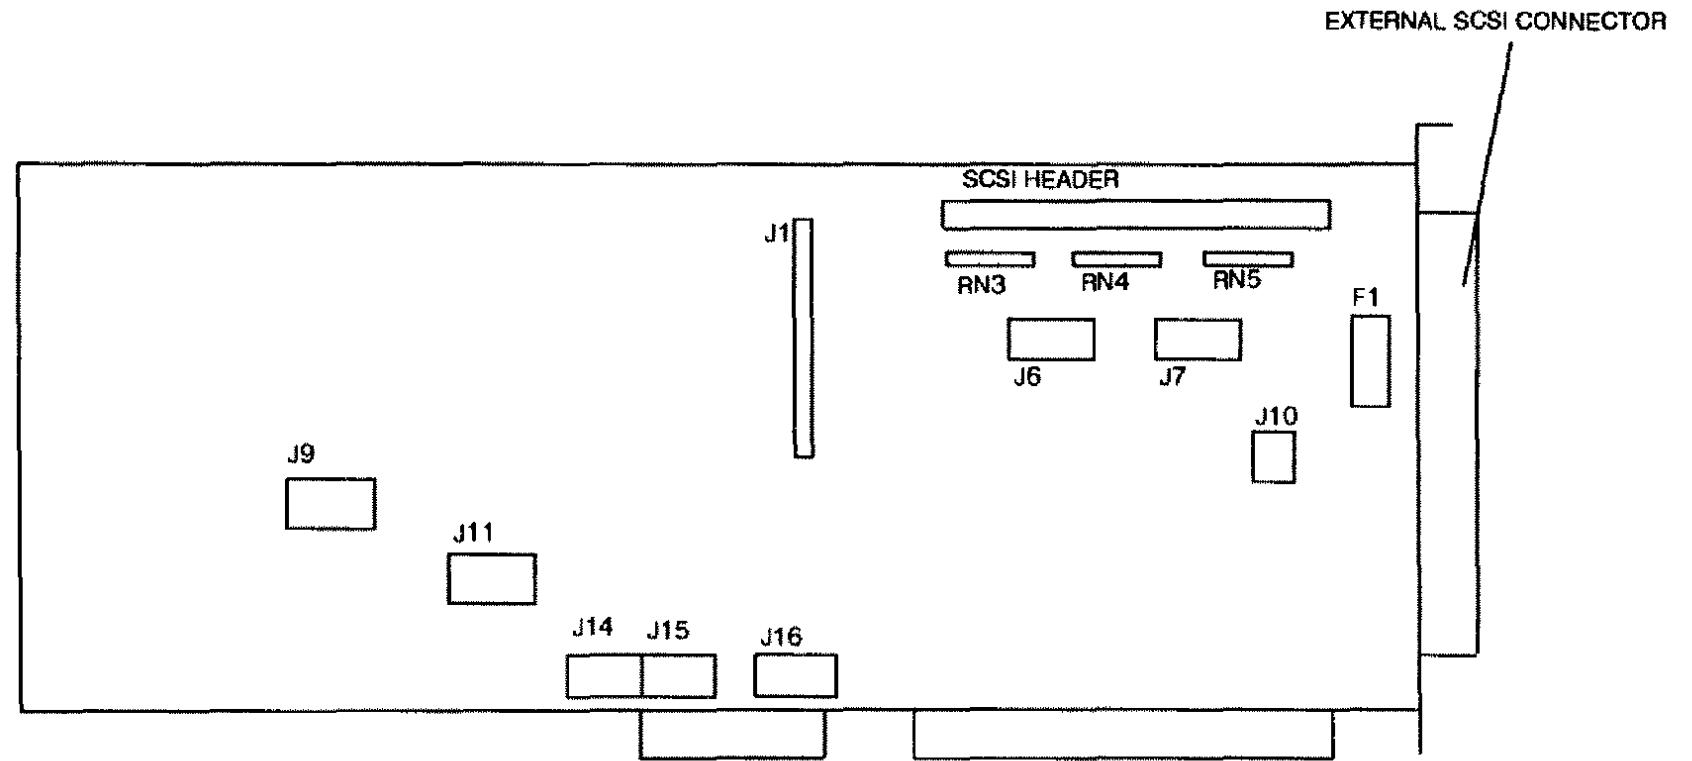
16 Bit SCSI Hard Drive Adapter Board 25-4161B
